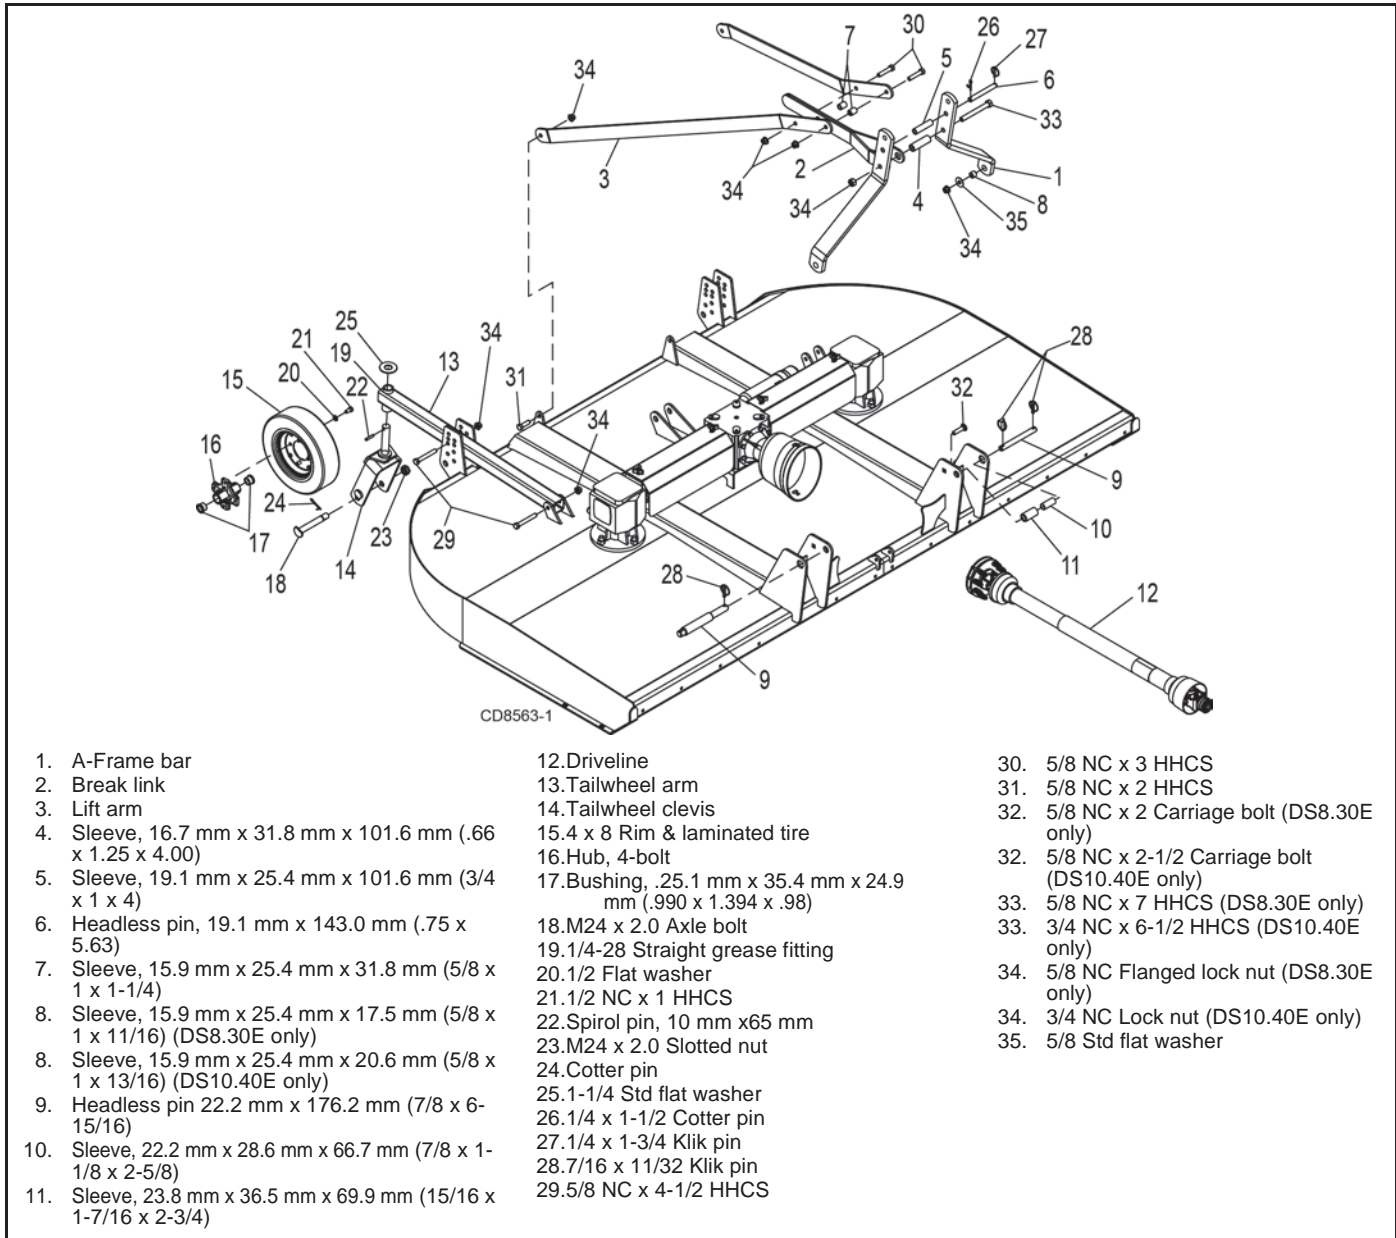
DS8.30E & DS10.40E Mounted Assembly
